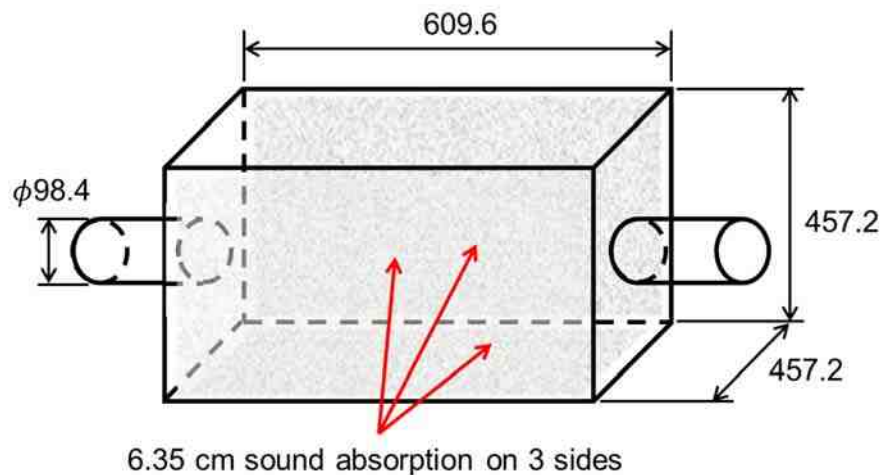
Schematic showing dimensions for full-scale model (units in mm).
